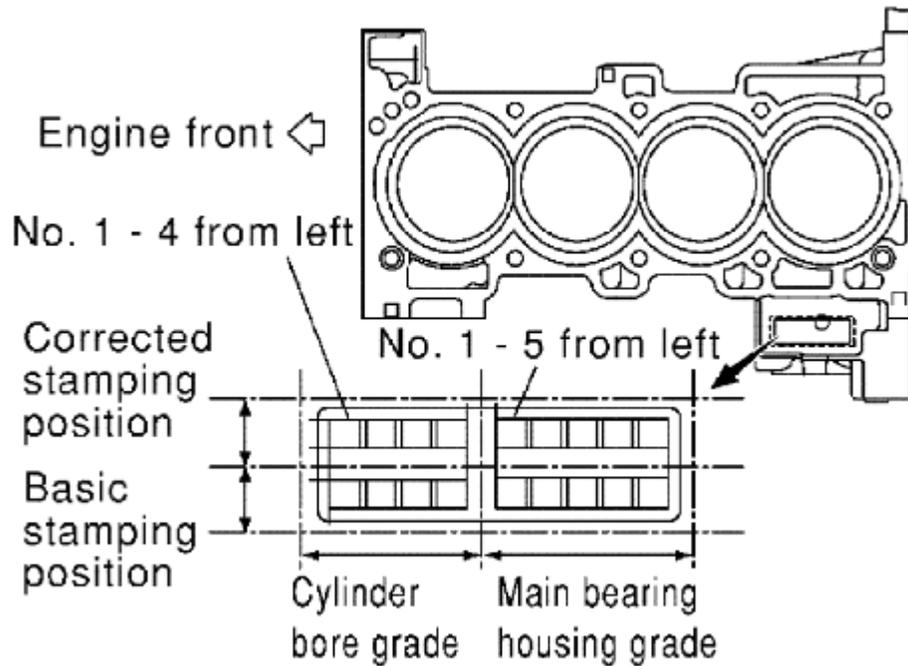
Identifying Main Bearing Housing Grade And Cylinder Bore Grade
